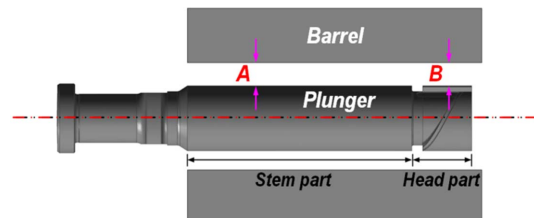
Dimensionless clearance of stem part (A) and head part (B) [1-2, 5-6].
